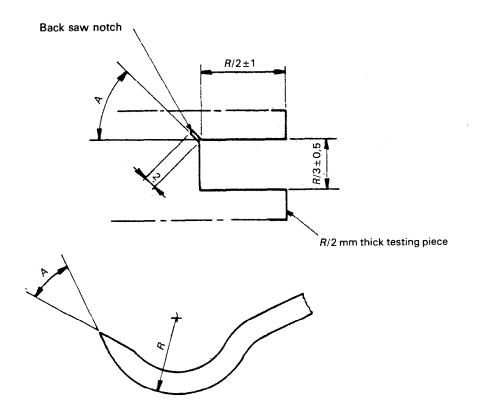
Bending test of the binding wire cutter: details of testing piece.
